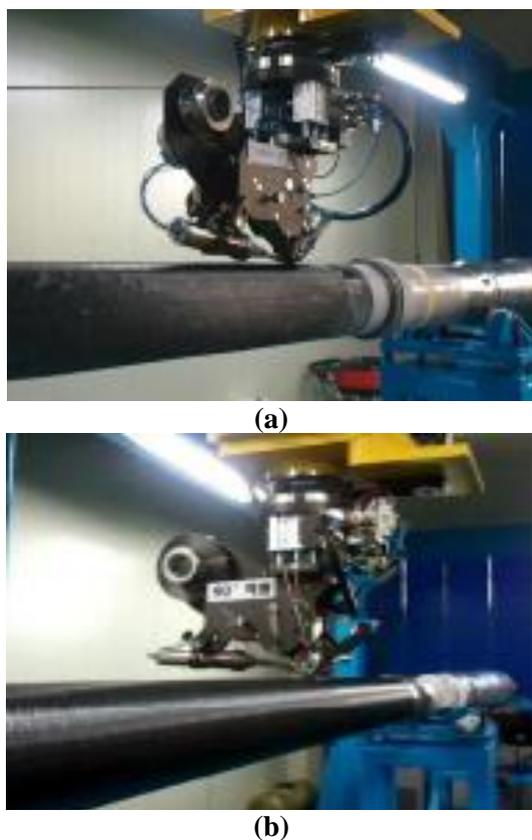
An automated tape placement processing system with a pressing roll and hot gas torch system;
